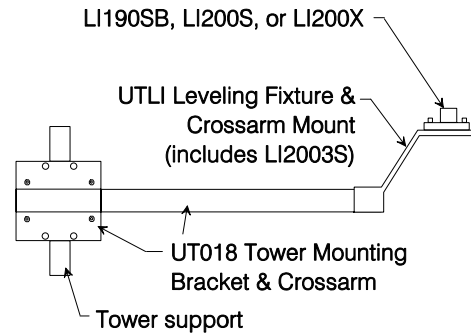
UTLI Leveling Fixture and Crossarm Mount and UT018 Tower Mounting Bracket and Crossarm
